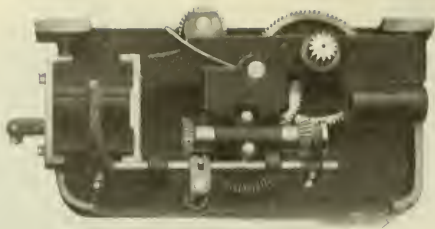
Apron of National Geared-head Lathe shown in Fig. 1
